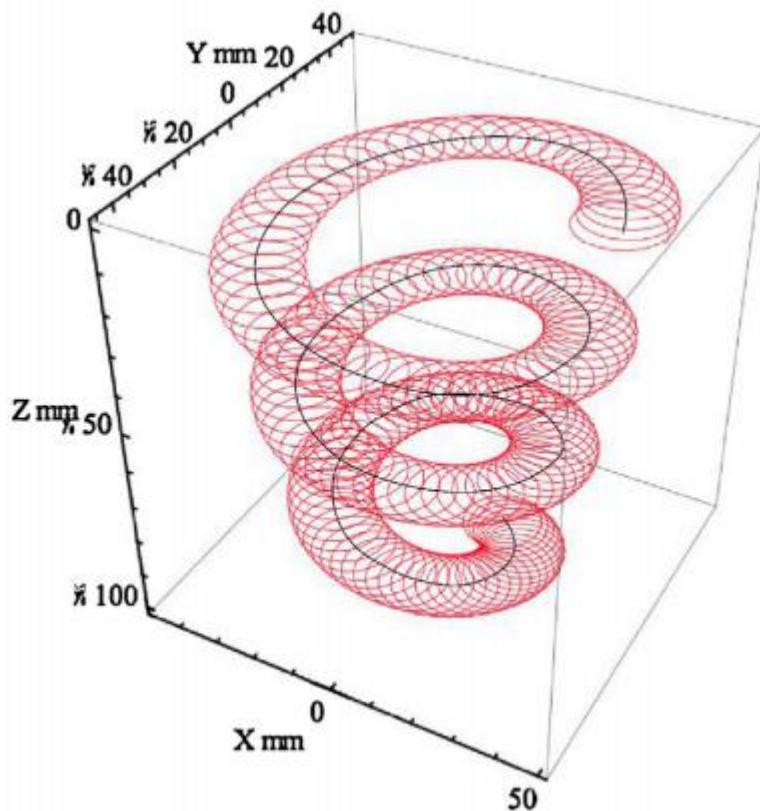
Thread milling cutter trajectory of a point on the cutting edge for API thread [51]. Thread milling cutter follows a helical path.
